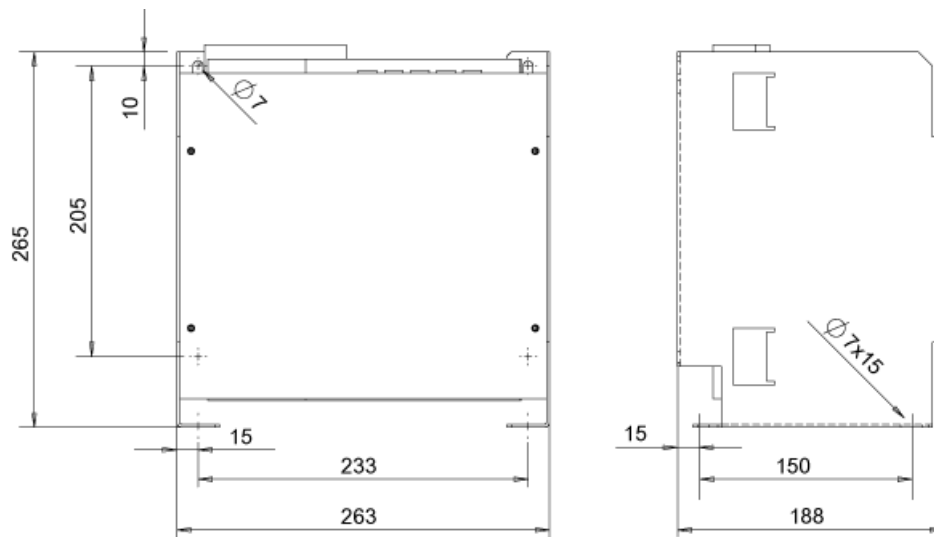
Dimension drawing of the Voltage Peak Limiter, type 1
